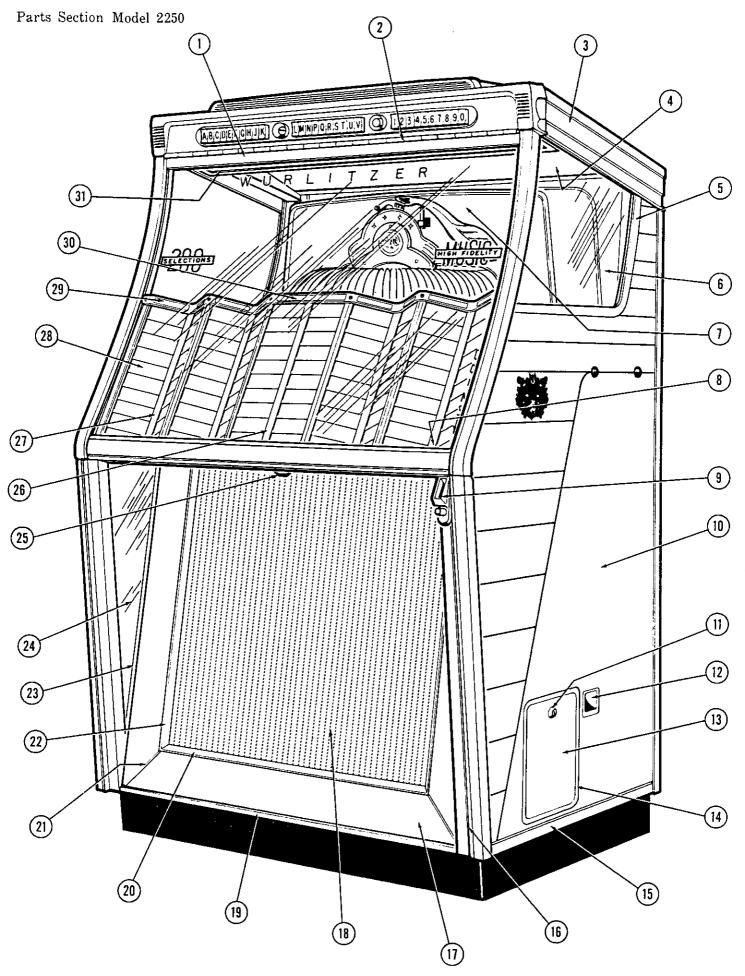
TRIM AND MOUNTING - FRONT VIEW
